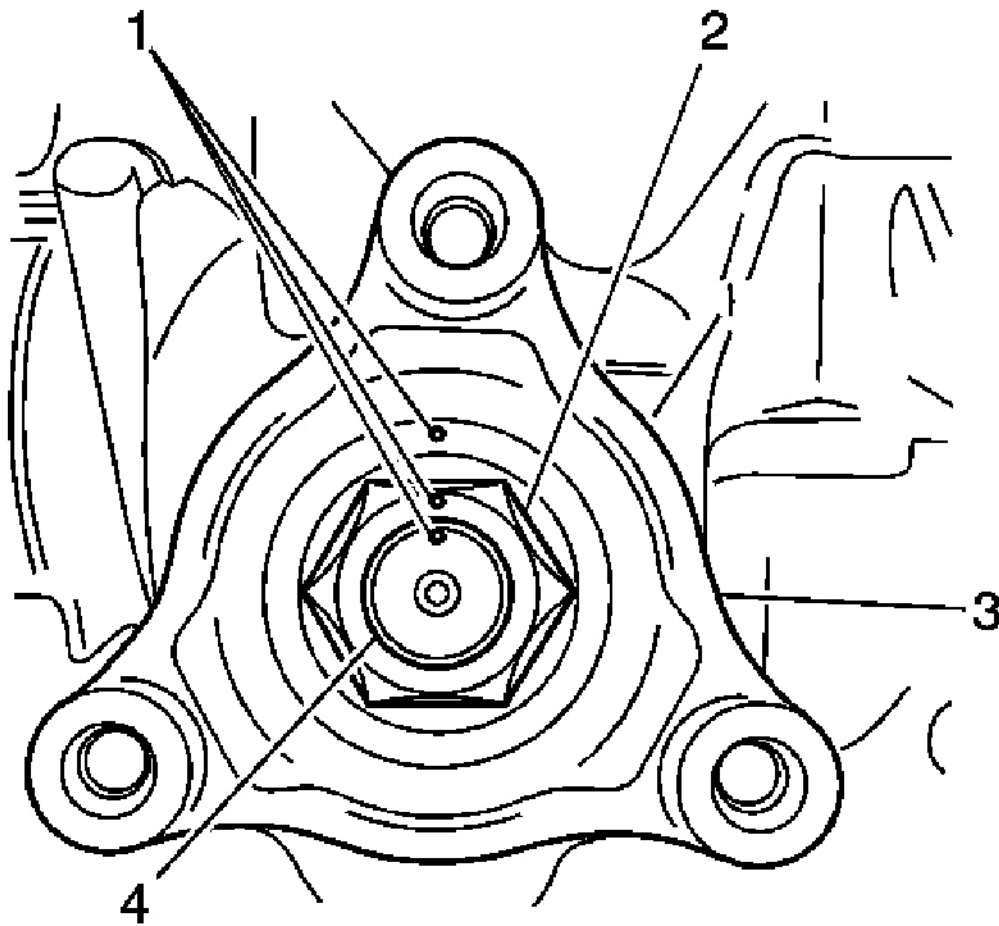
View Of Pinion Flange Nut & Alignment Marks
